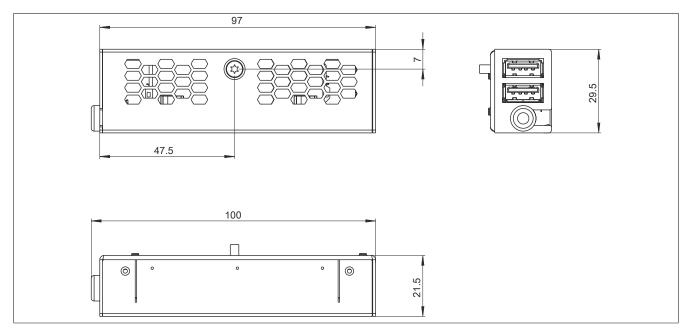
5ACCUSB4.0000-000 - Dimensions
